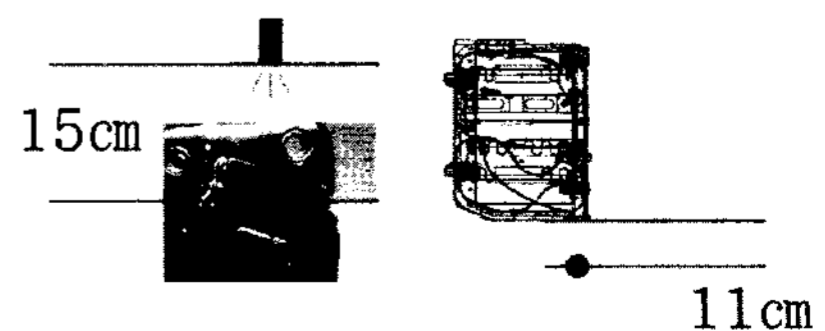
Illumination setup for thickness of welding bead inspection
